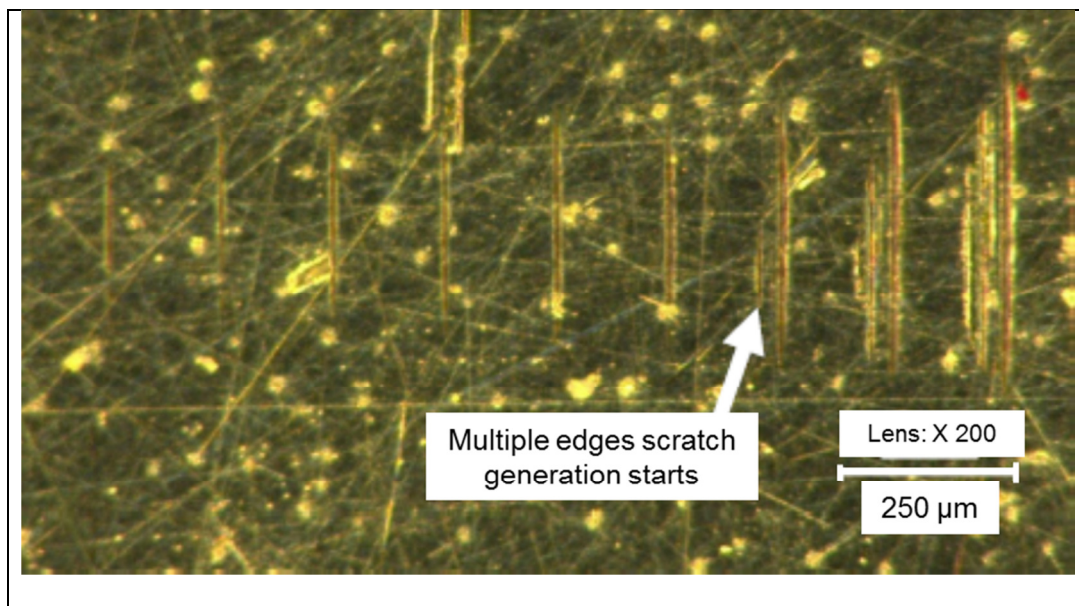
Microscopic picture shows that where the grit started to generate multiple edge scratches on the Inconel 718 workpiece.
